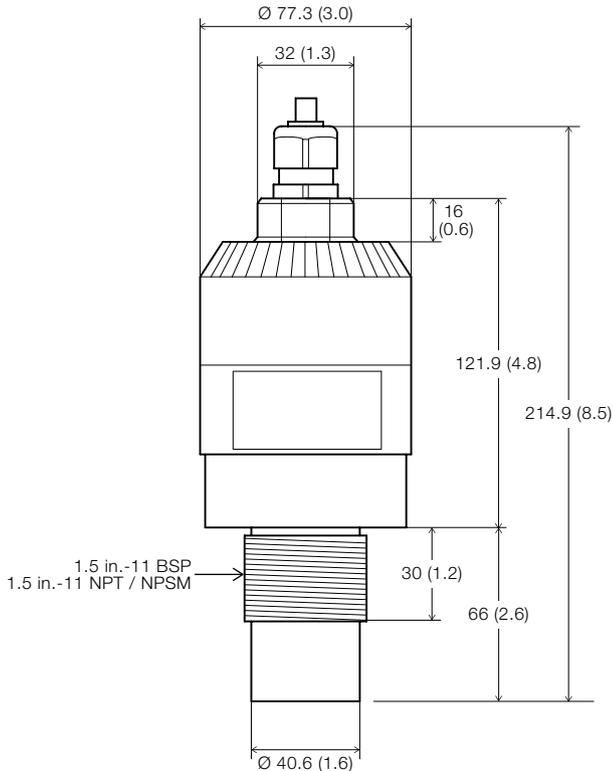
Transmitter with 1.5 inch thread dimensions
